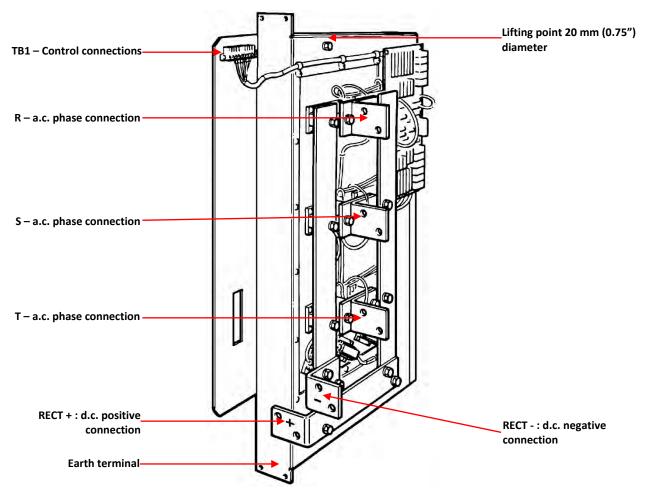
DELTA Rectifier Module (GDR872-4601)
